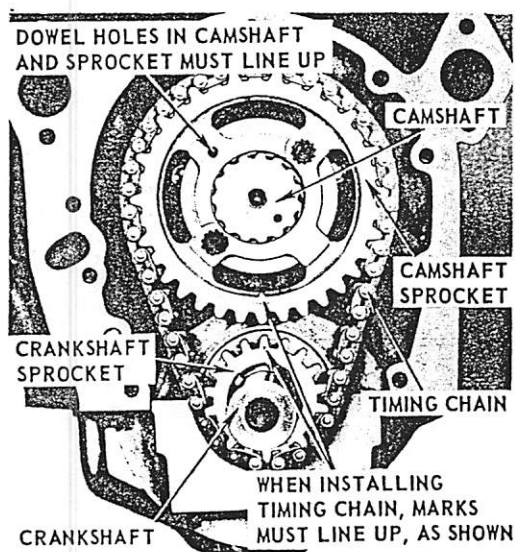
Front view of typical timing chain drive. Shows alignment of valve timing marks. (Cadillac)
